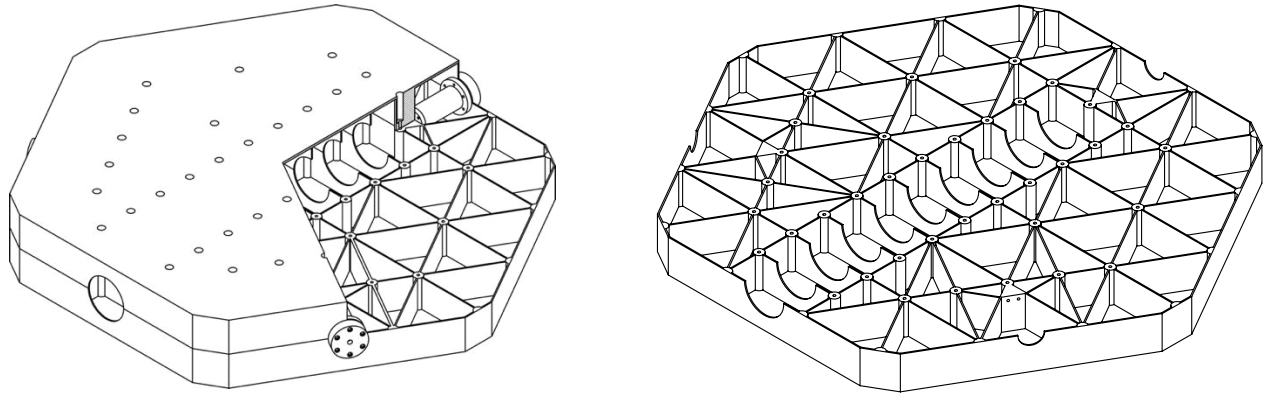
Optical table is designed to be fabricated in two halves, machined from individual billets.
